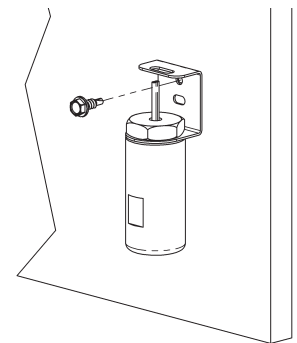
Hanging Bracket Wall Installation (Customer Provided Screws)
